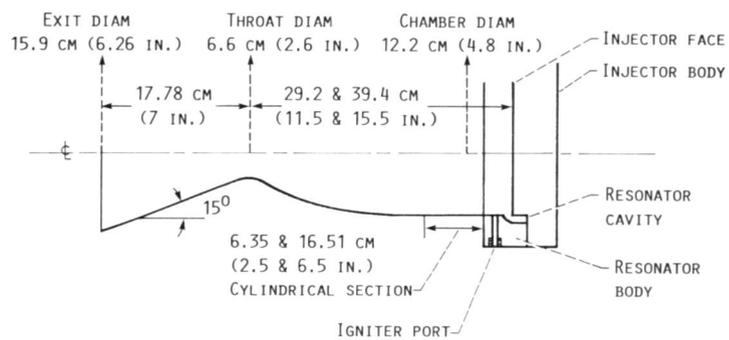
THRUST CHAMBER DIMENSIONS.
